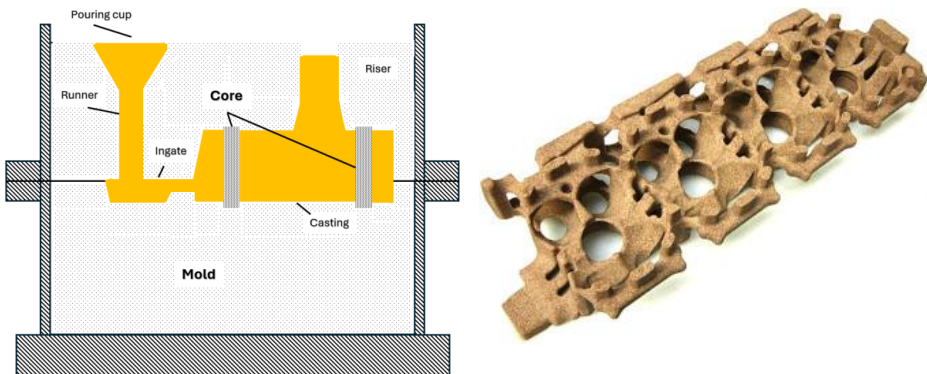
An illustration of the sand casting process (a). chemically bonded water jacket core used to manufacture cylinder heads (b) [6].
